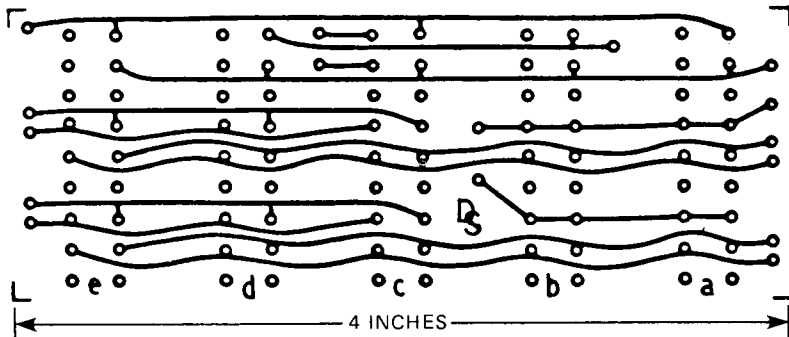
SINGLE-SIDED BOARD is used to mount switch S6 (see Fig. 4 for connection details).
